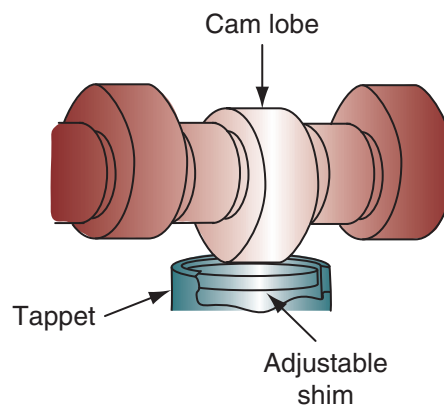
Some camshafts ride on a tappet that contains a removable shim, which is used to adjust valve clearance.
